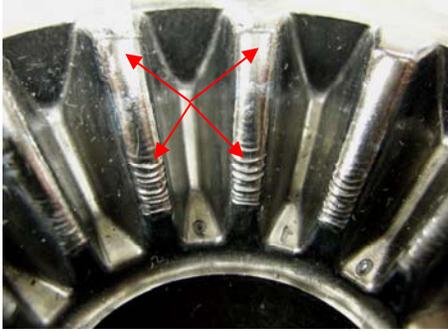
Large cracks on SSDPC CCM+ and DM21 tooling.
